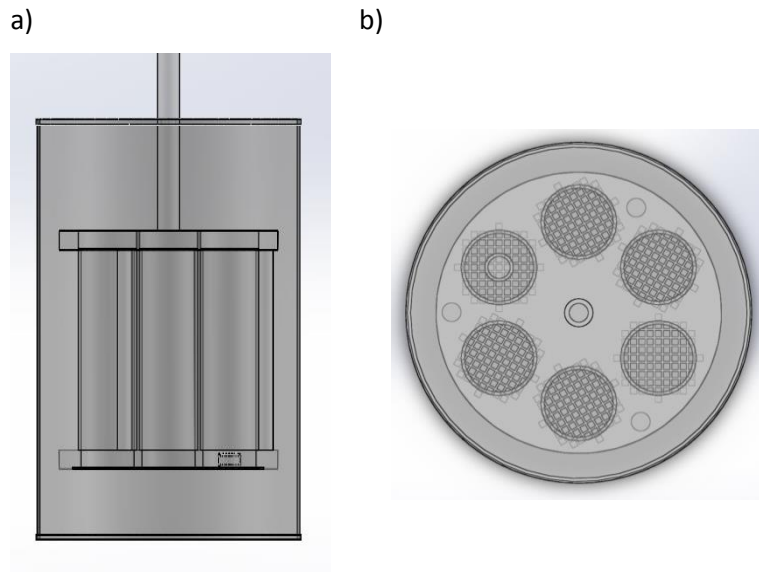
Reconstructed CFD geometry of PhEur basket-rack assembly with surrounding beaker. a) Front view, b) top view.
